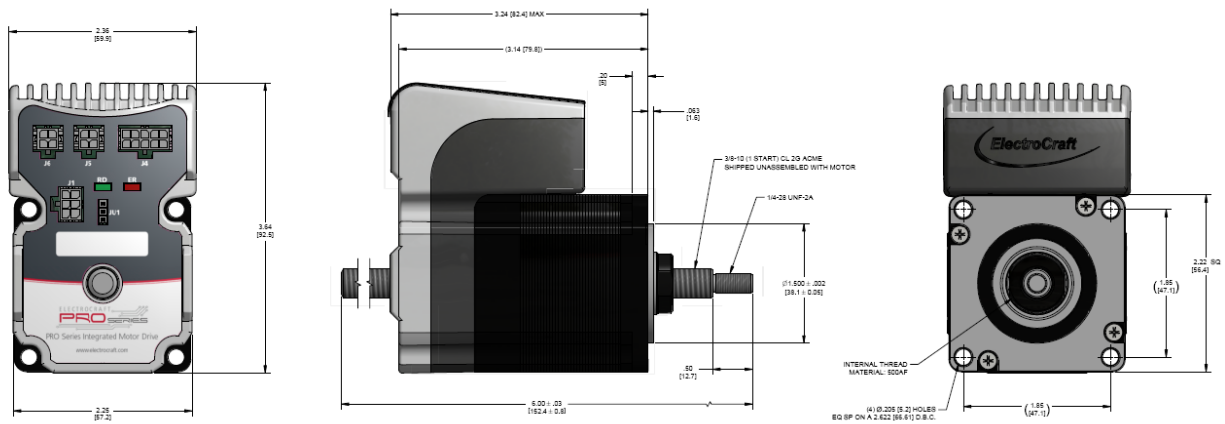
PS56-A106V48A-0SB7-X-CAN mechanical dimensions.
